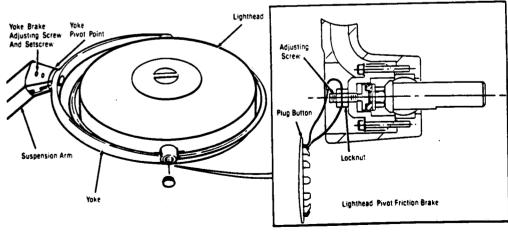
LIGHTHEAD BRAKE ADJUSTMENT.
